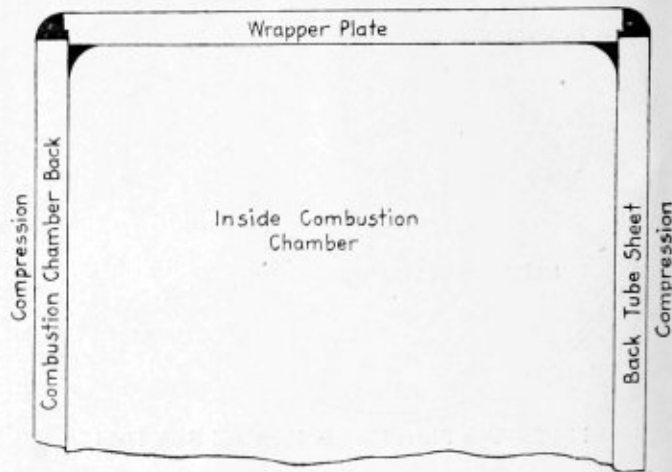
Welding the Wrapper Sheet in Place
